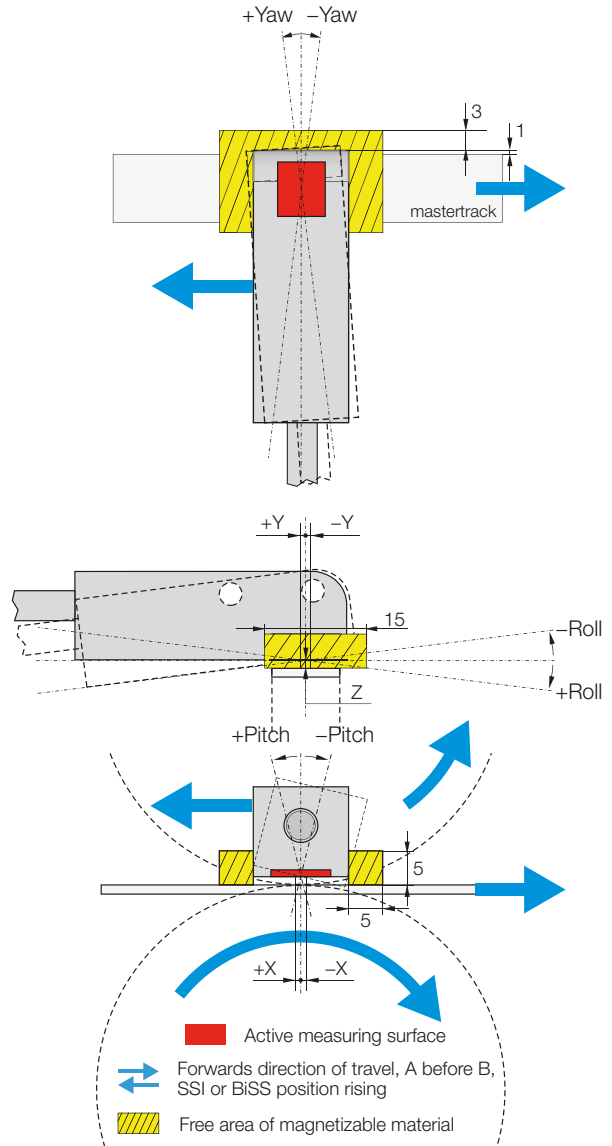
BML-S1H2... distances and tolerances
